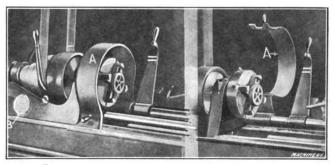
Guard for the Lathe over Faceplate or Chucks
